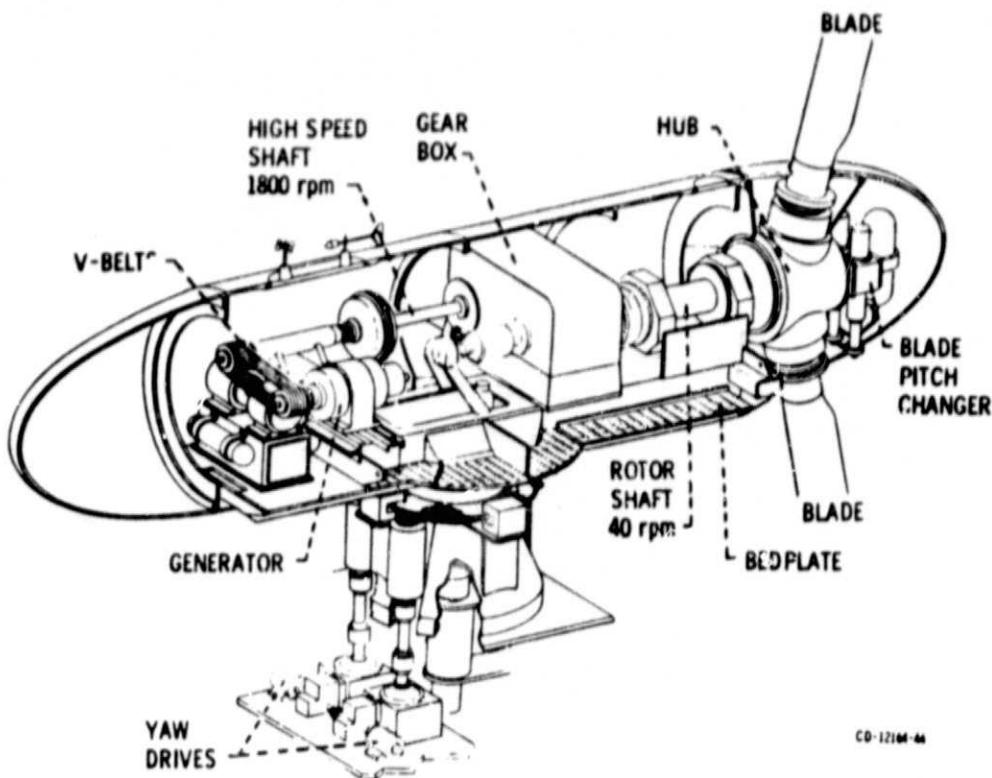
Mod-0/0A drive train assembly and yaw system.
